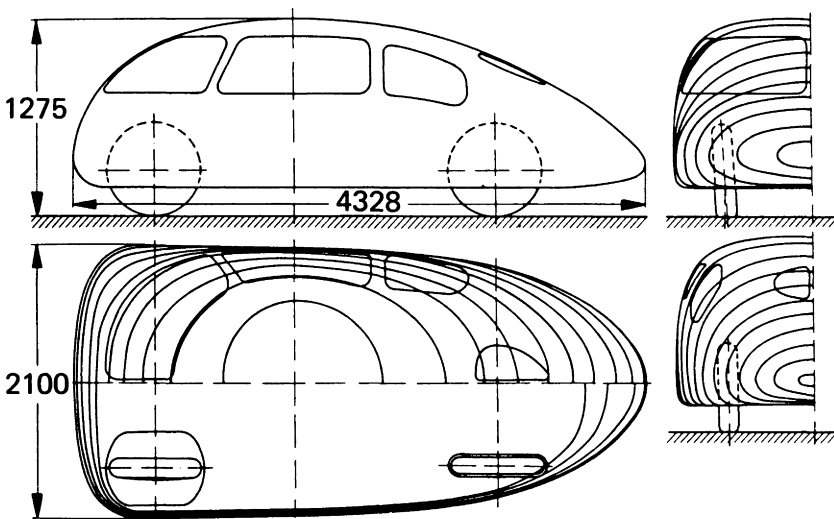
Plan and side elevation of the Schlör car, after ref. 1.49
